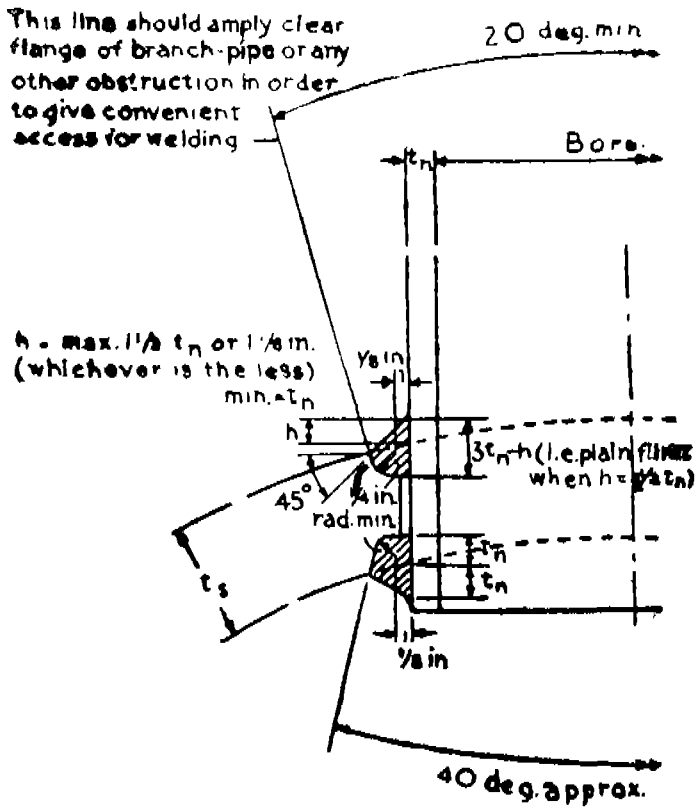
B. Weldolet in standpipe or branch for standpipes or branches up to and including 4 in. bore
